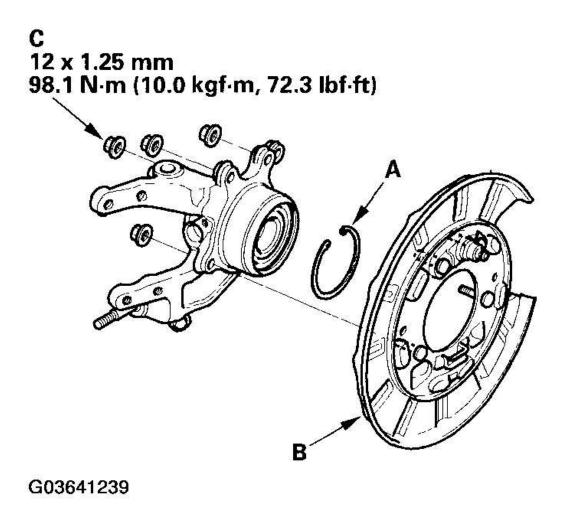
Installing Snap Ring, Backing Plate And Flange Nuts Courtesy of AMERICAN HONDA MOTOR CO., INC.
